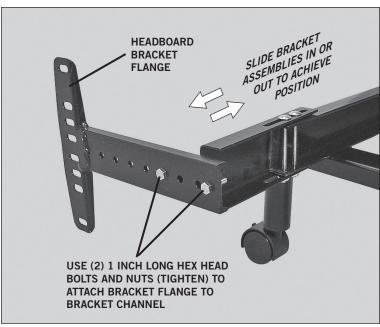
Headboard bracket flange installation (attach one flange to each of the headboard bracket channels).
